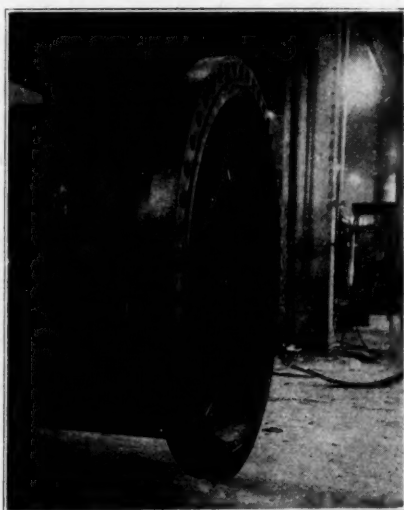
CAST DOOR FLANGE SET UP FOR WELDING INTO HEAVY STEEL TANK
